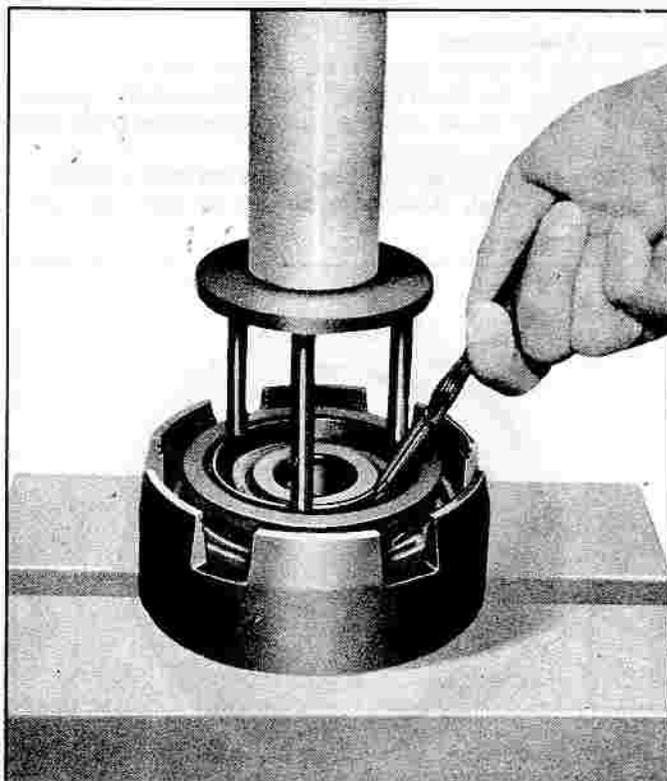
E-36—Removing Clutch Drum Spring Retainer with J-5133 and J-7782
